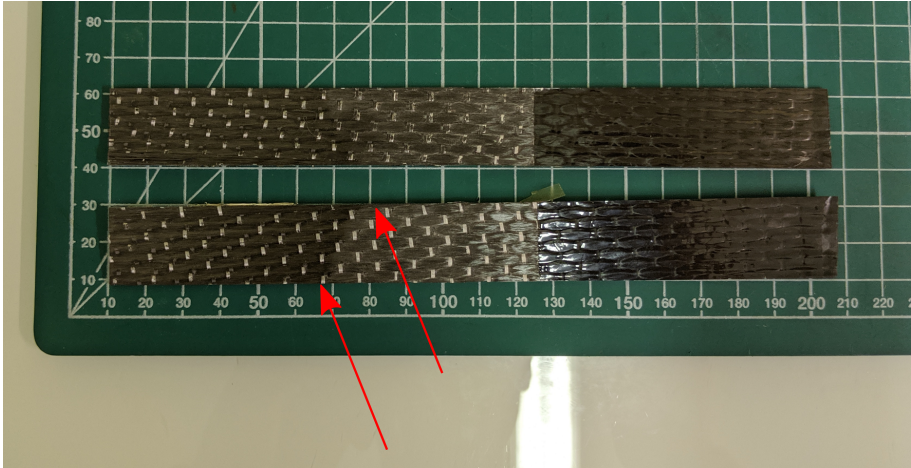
Fracture surface of a fatigued els specimen, red arrows point at the crack front delimitation
